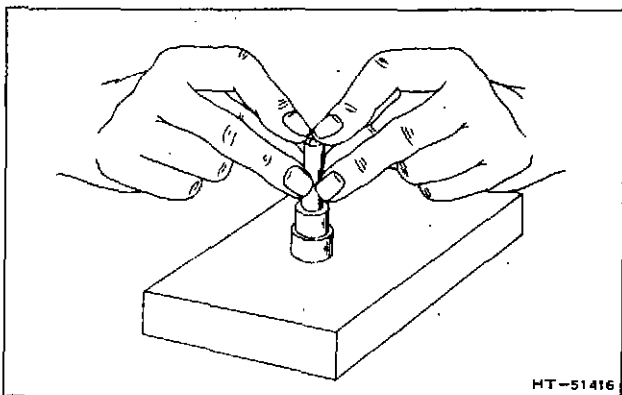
Lapping Fuel Injection Nozzle Valve Body
